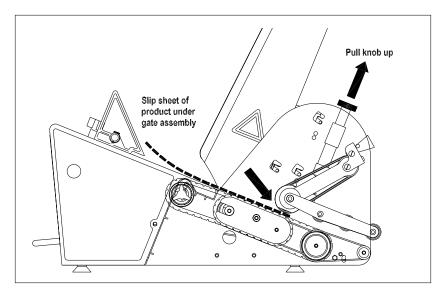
Lifting Gate Assembly Upward to Insert Product
